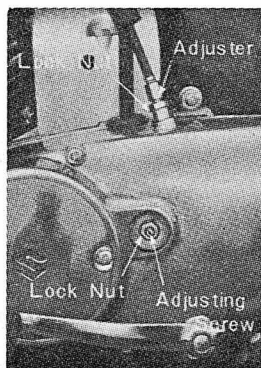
View of 80 cc left side showing points of clutch adjustment.
